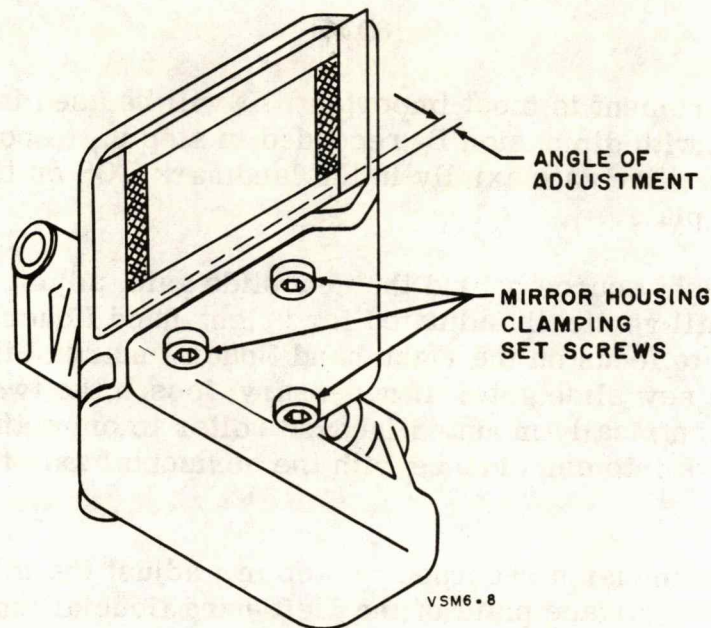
Mirror Rhomb Adjustments and Clamping Screws
